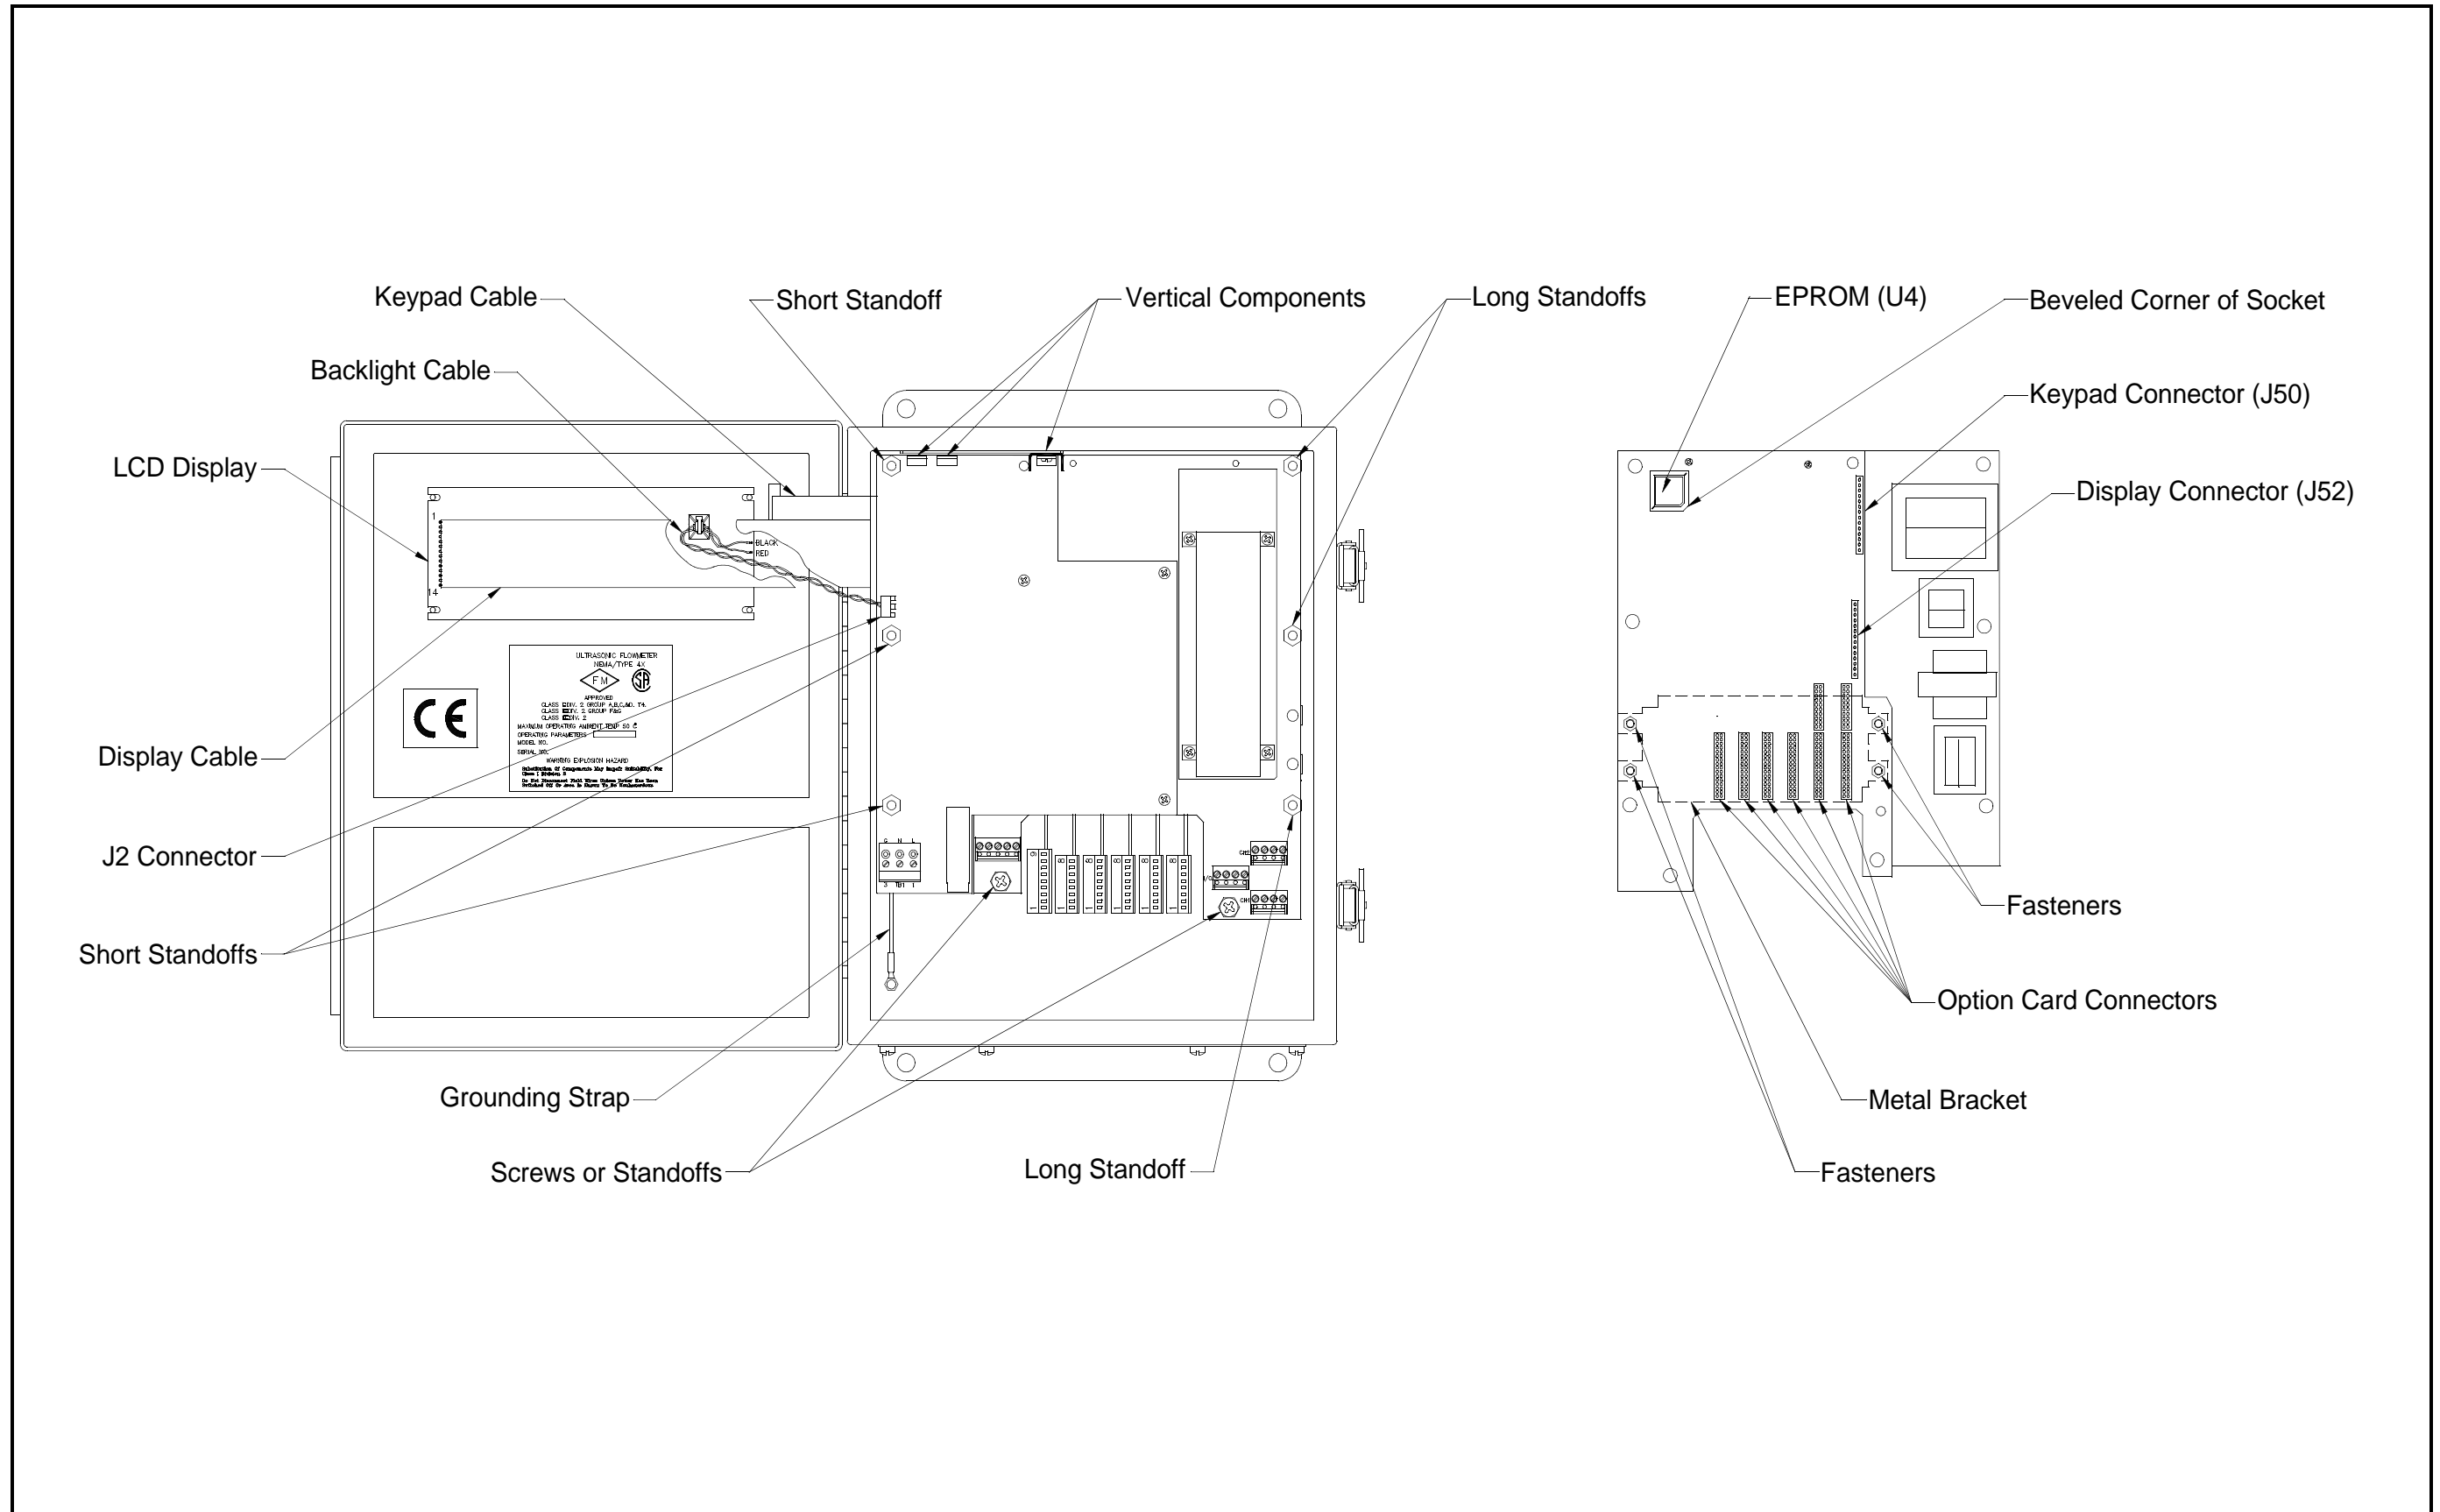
Standard Model DF868 - Printed Circuit Board Assembly
